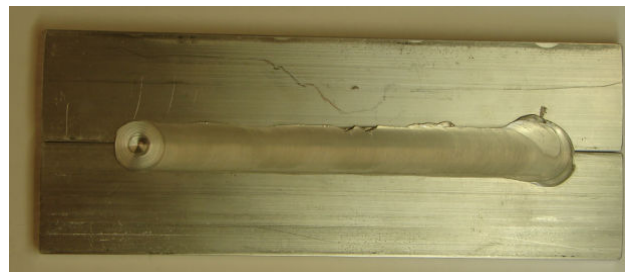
Weld sample of force control via plunge depth.
